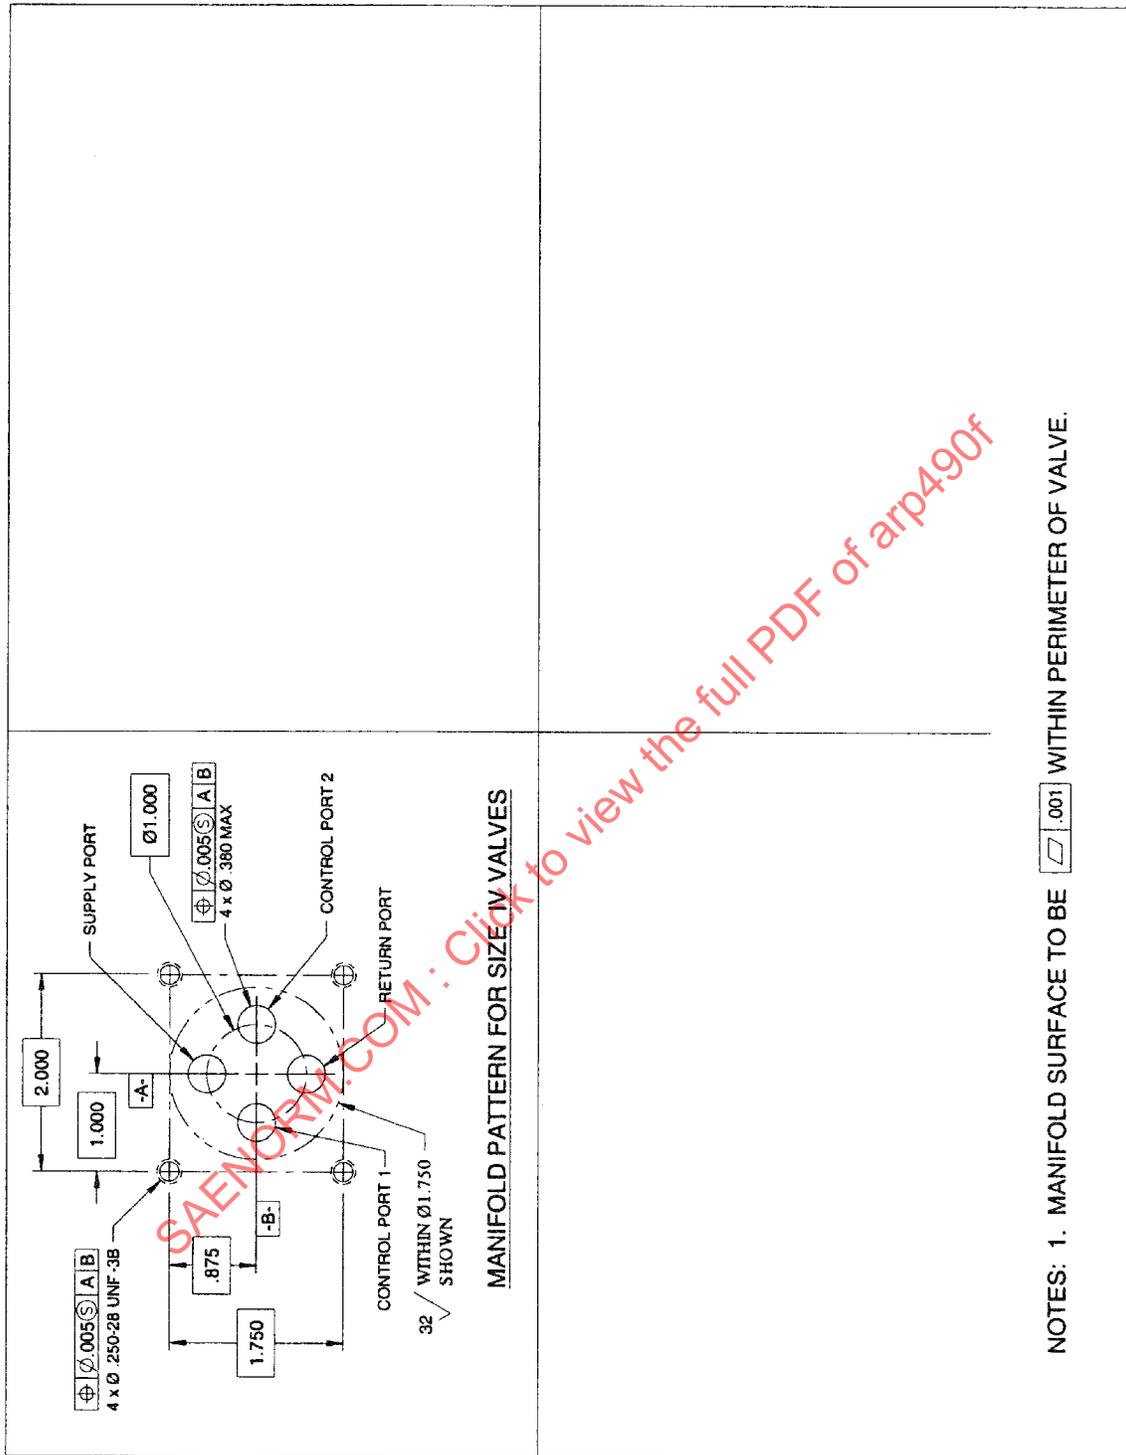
STANDARD MOUNTING INTERFACES (CONTINUED)
